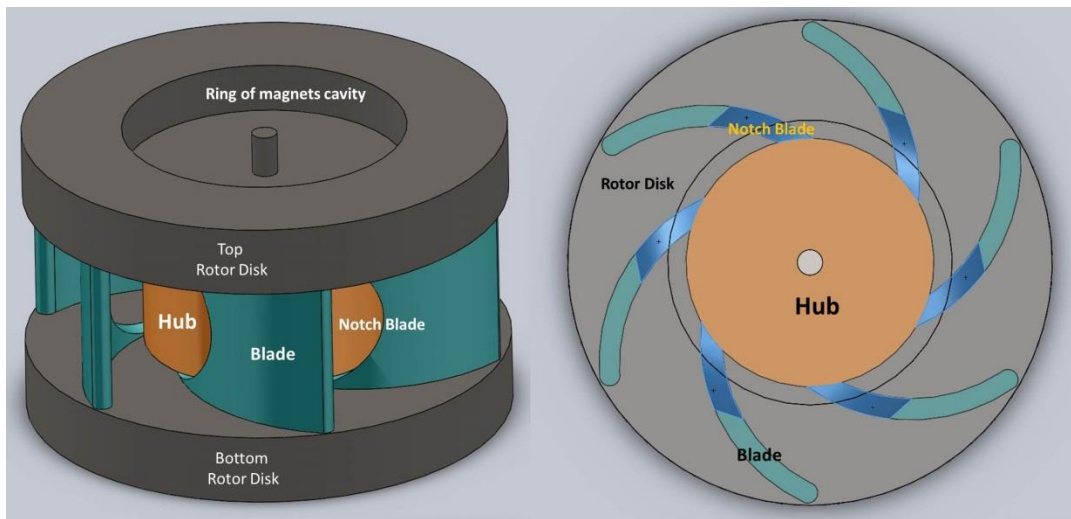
Rotor isometric and top plane section view. Isometric - left side, and rotor top plane section view – right side.
